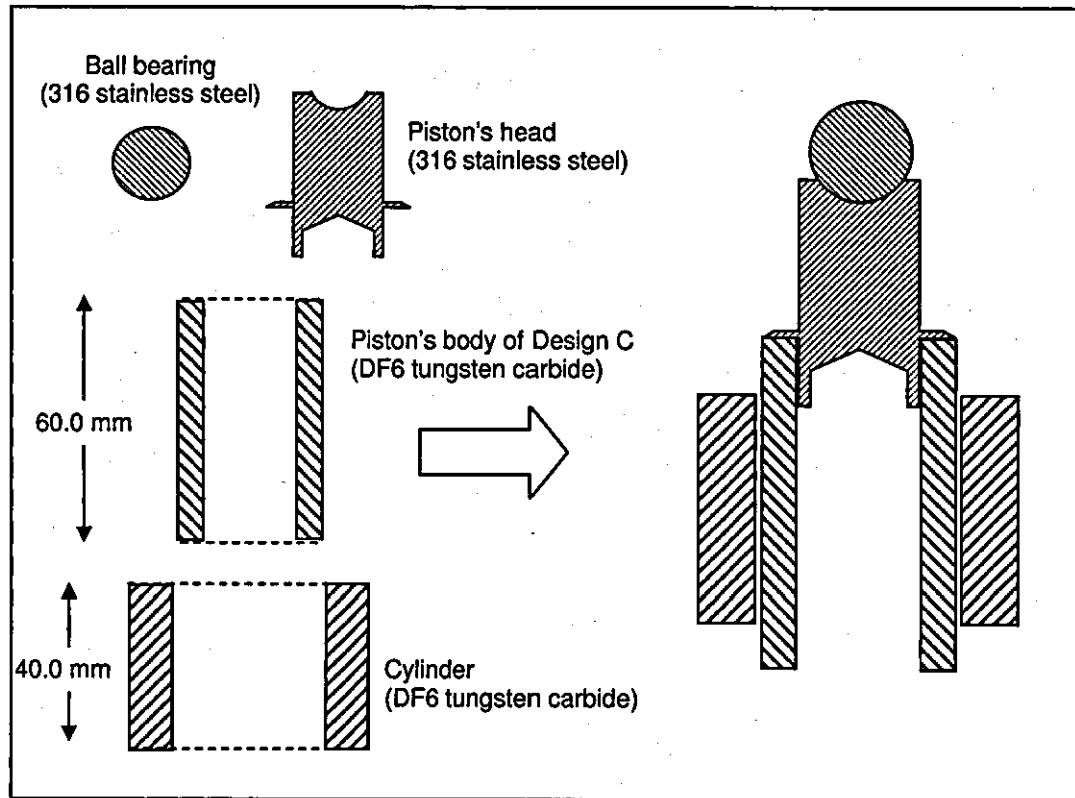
The DF6 tungsten carbide piston-cylinder assembly (PCA)
